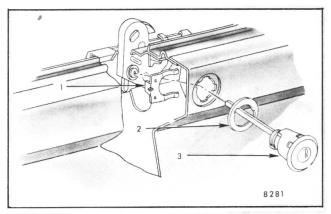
Typical Side Loading Lock Cylinder Retainer - "H-77" Shown
